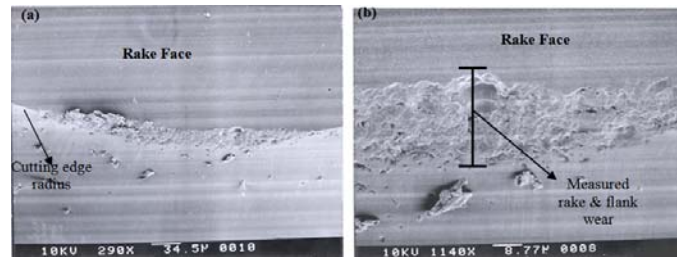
(a) & (b): SEM images of the cutting edge of the diamond tool after machining.
